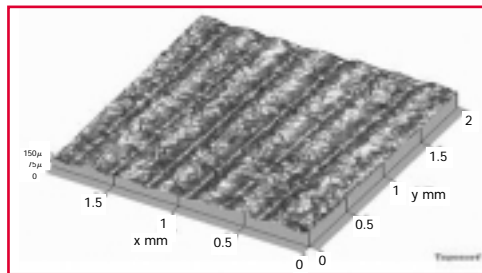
A 3-D image of a casting surface obtained by casting commercial purity Al onto the coating surface shown in Figure 5
